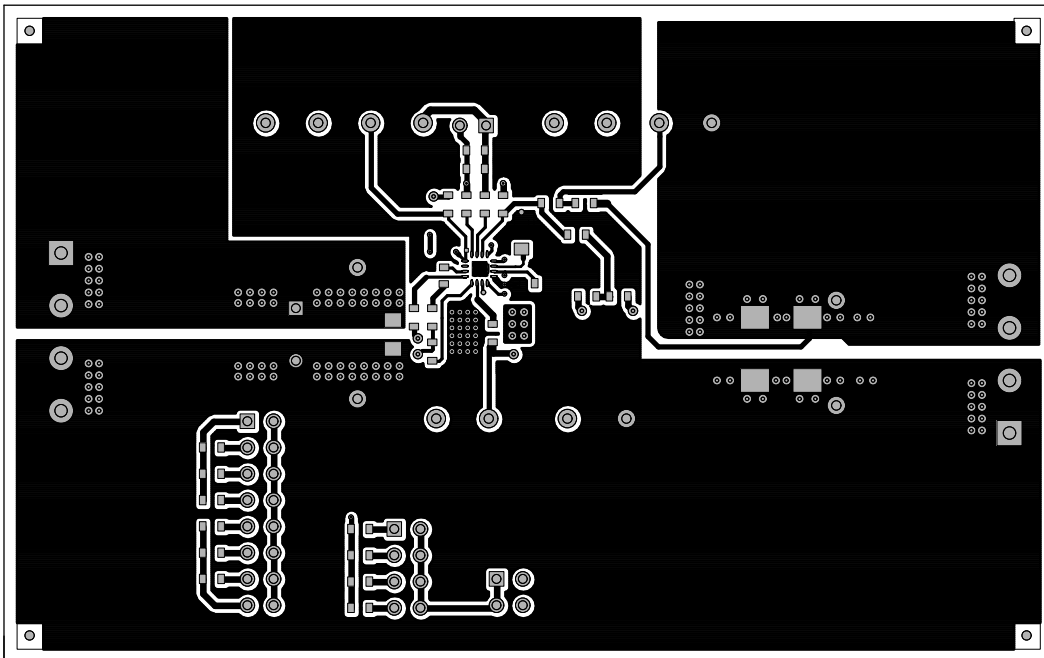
TPS53119EVM-690 Bottom Layer Copper, Top View
